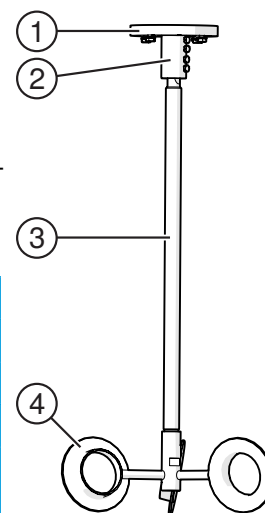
Agitating tool (Fig. Propeller with perforated disk)
